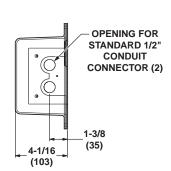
Dimensions of the ASK75.1U Weather Shield in Inches (Millimeters).
